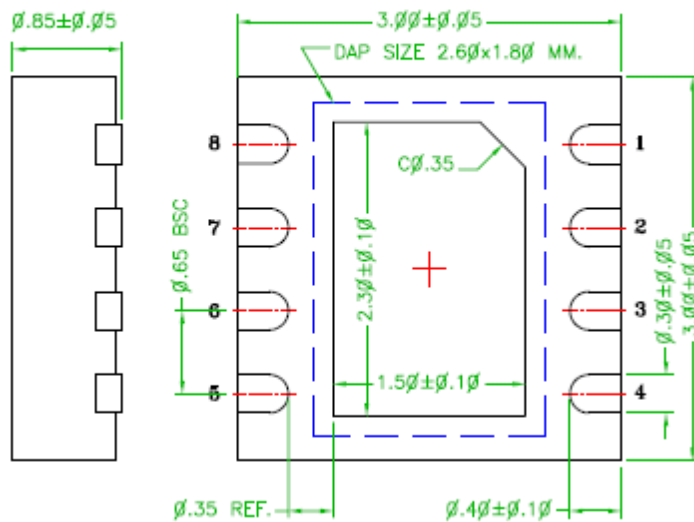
CoCo available in DFN8 plastic package. All dimensions in mm.
